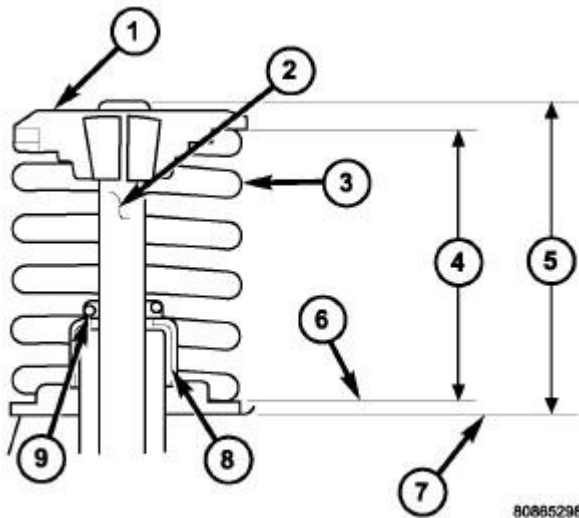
Valve Tip Height & Valve Spring Installed Height
